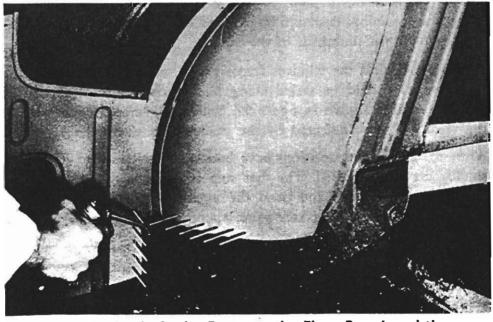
Apply Sealer Between the Floor Panel and the Wheel House and the Inner Panel.
